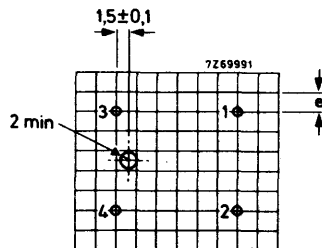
Hole pattern for mounting on a printed-wiring board (component side). Hole diameter  $1,3 + 0,1$  mm.  $e = 2,54$  mm (0,1 in).
